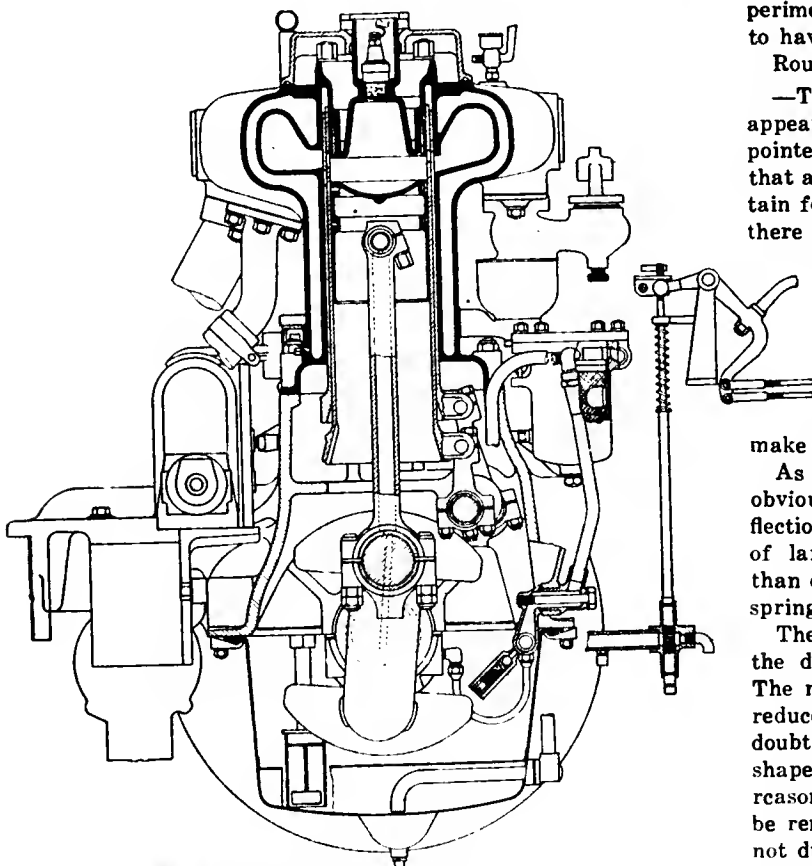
Transverse section through Stearns-Knight six-cylinder engine
